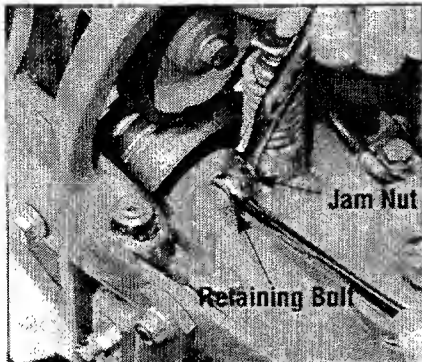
Hold bolt steady while loosening or tightening jam nut.
